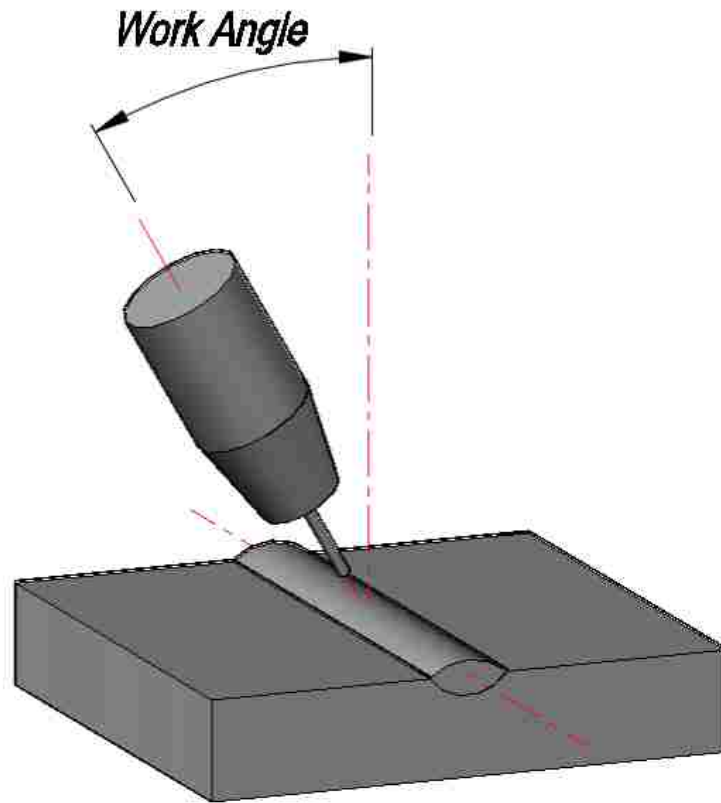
Welding work angle (reproduced from Linnert 1994)
